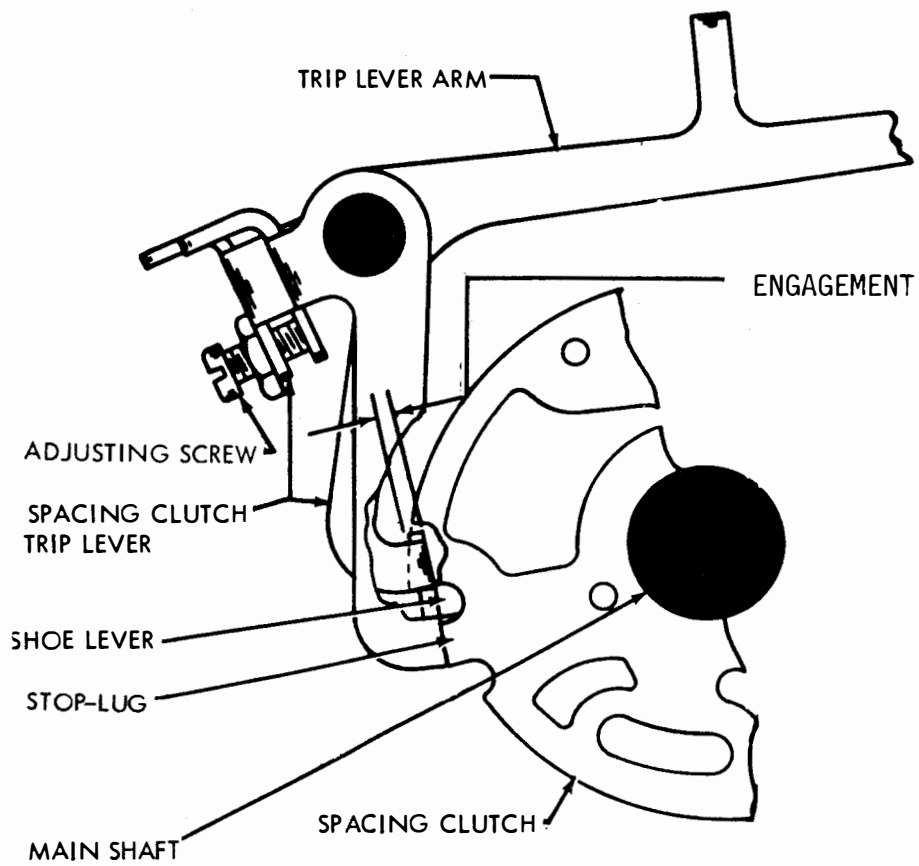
Spacing Clutch Trip Lever, Left Side View
